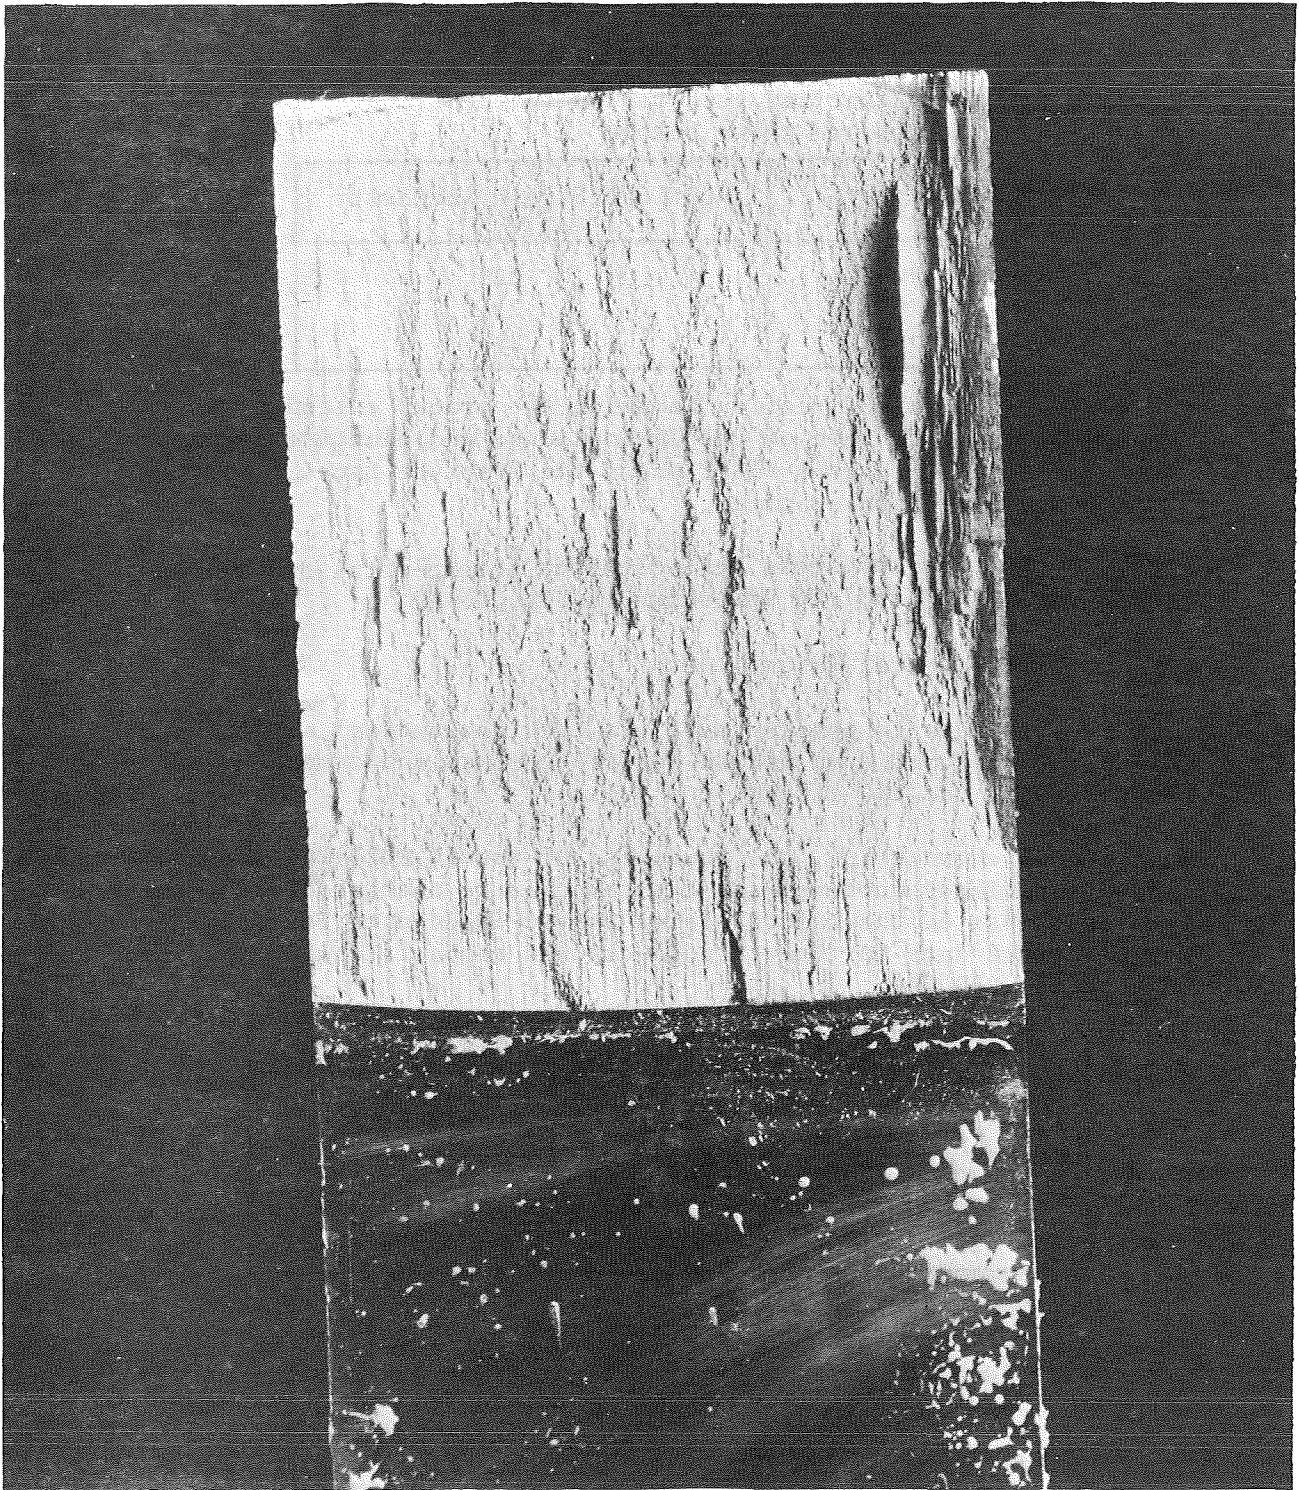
Fracture Face of Parent-Metal X7007-T6 Compact-Tension Specimen
